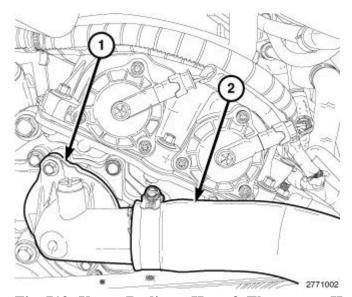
Upper Radiator Hose & Thermostat Housing Courtesy of CHRYSLER GROUP, LLC
